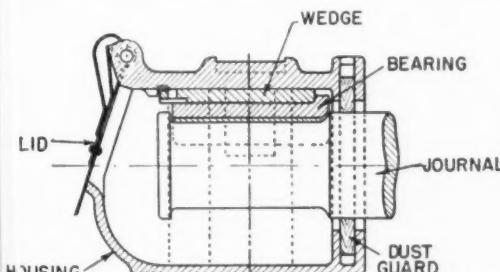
A section drawing showing the main parts of a plain bearing railroad journal box.
